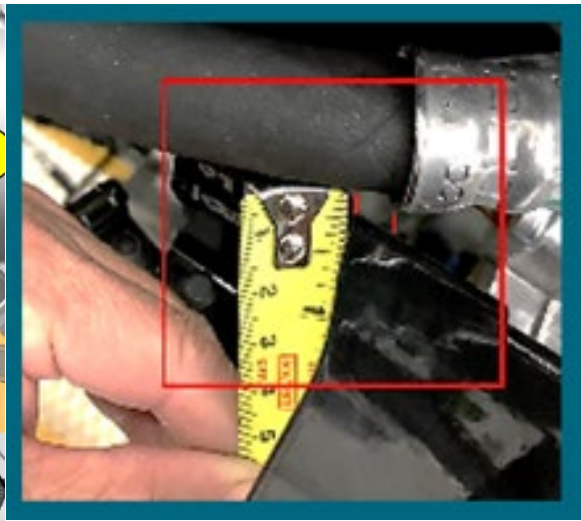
, Measuring Clearance between Low Pressure Fuel Line and Mounting Bracket
